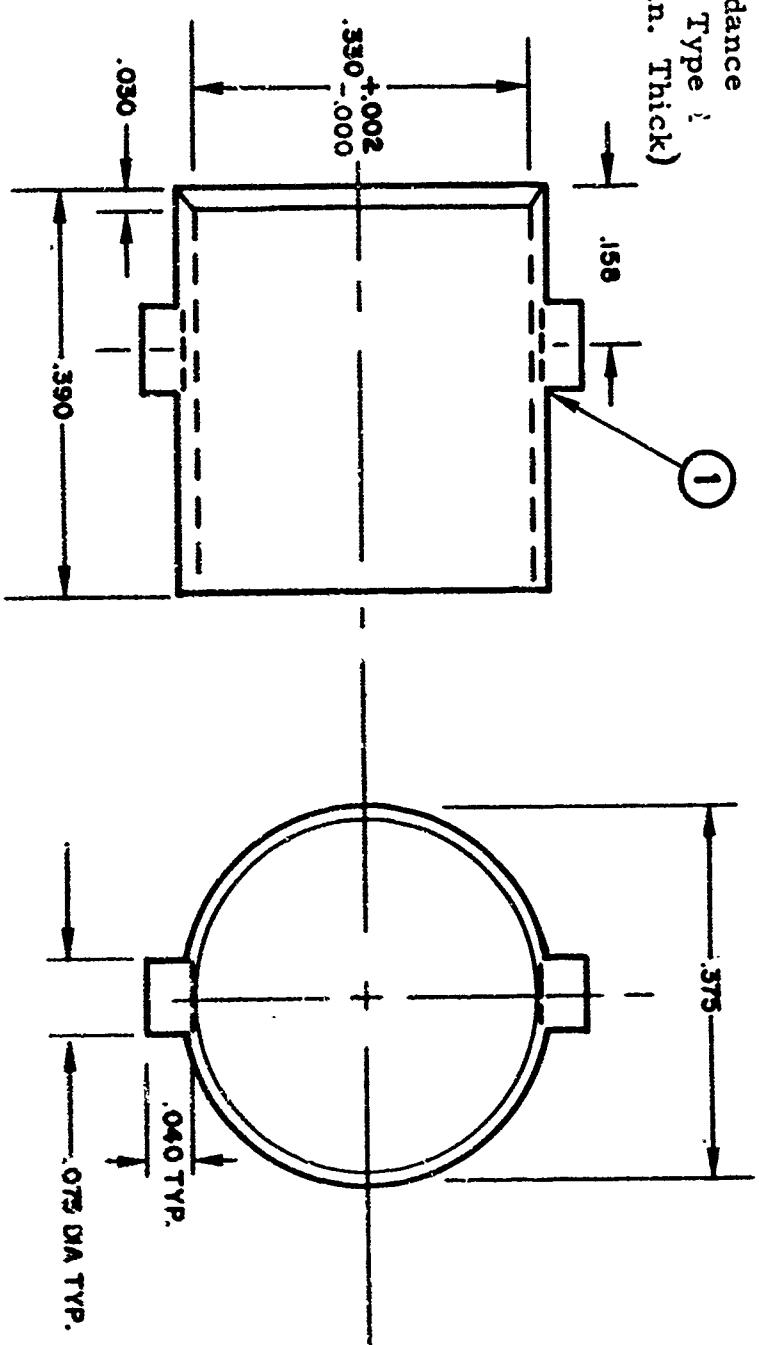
Drawing P-1009, Coaxial Connector (Stainless Steel Tubing, Grade 321).
